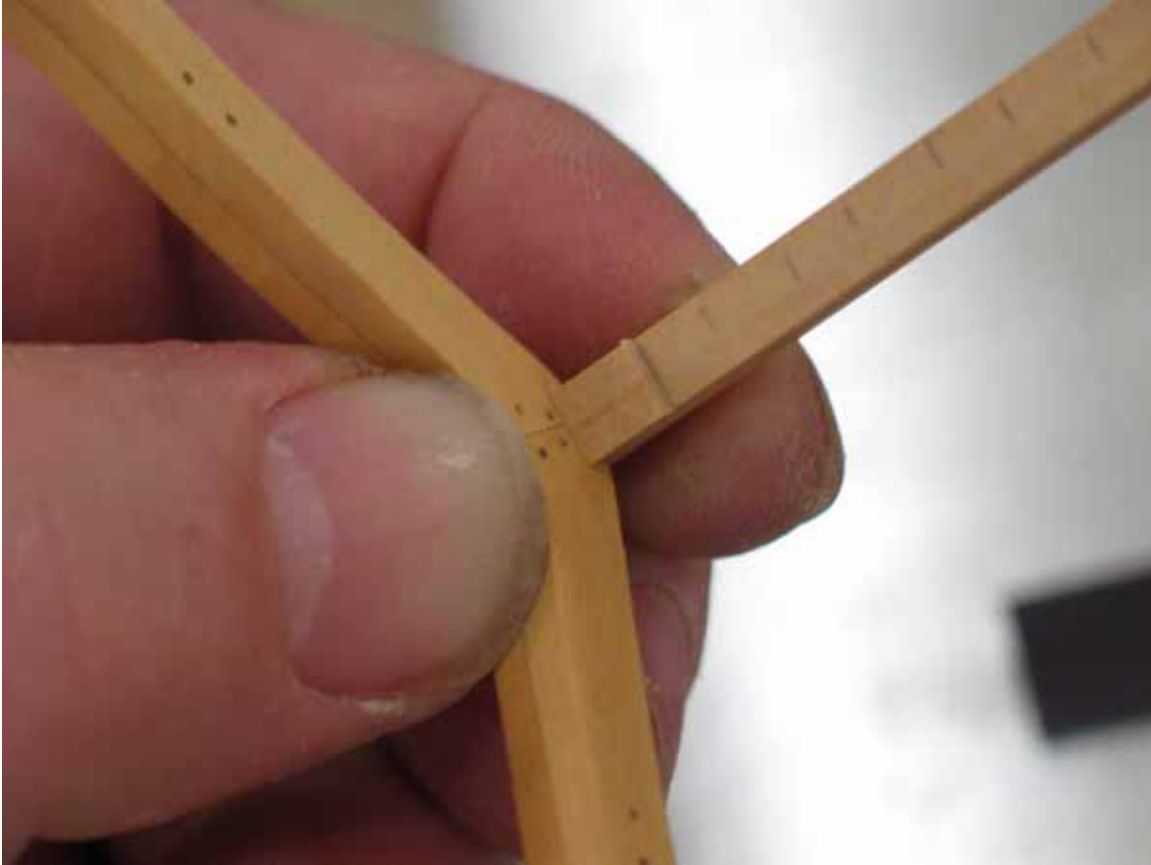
shows how I use the Preac to cut these boxing pieces. The first one is cut using a ruler to set the length and the table's rip fence with stop piece. I then test fit that piece to see if it ends on the line that denotes the fore surface of the next frame, frame C. If not, I make minor adjustments to the fence and try again. Sooner or later you get just the right length and then you stick with that setting until you see a need to make minor adjustments once again.
